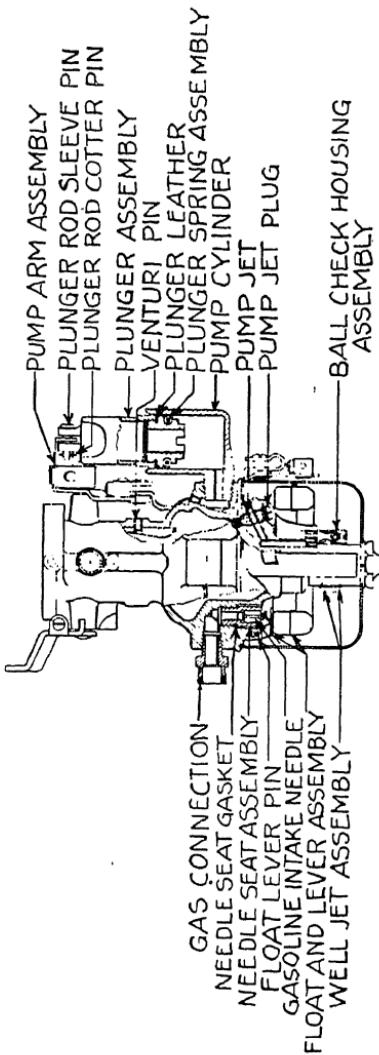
Section through Float Chamber of the Chevrolet "Six" Carter
